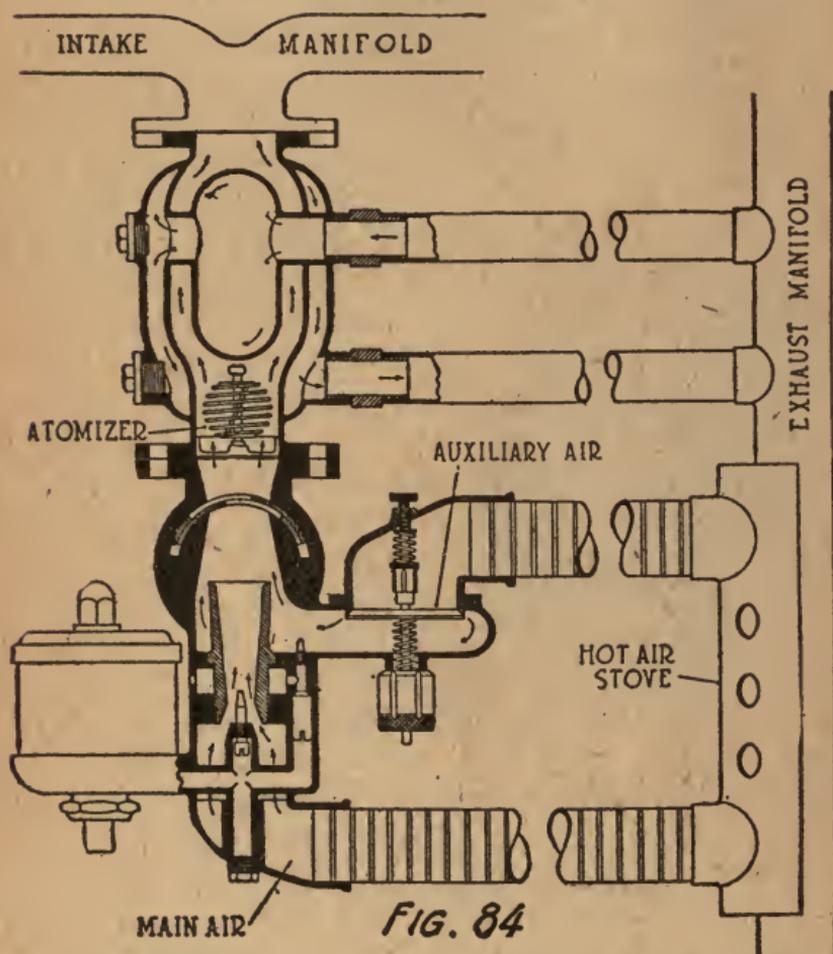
Section through Buckeye-Deppé Integrator, showing carburetor arrangement for heating the fuel and air and the mechanical atomizer in the form of a whirling fan placed above the special center-opening throttle.
